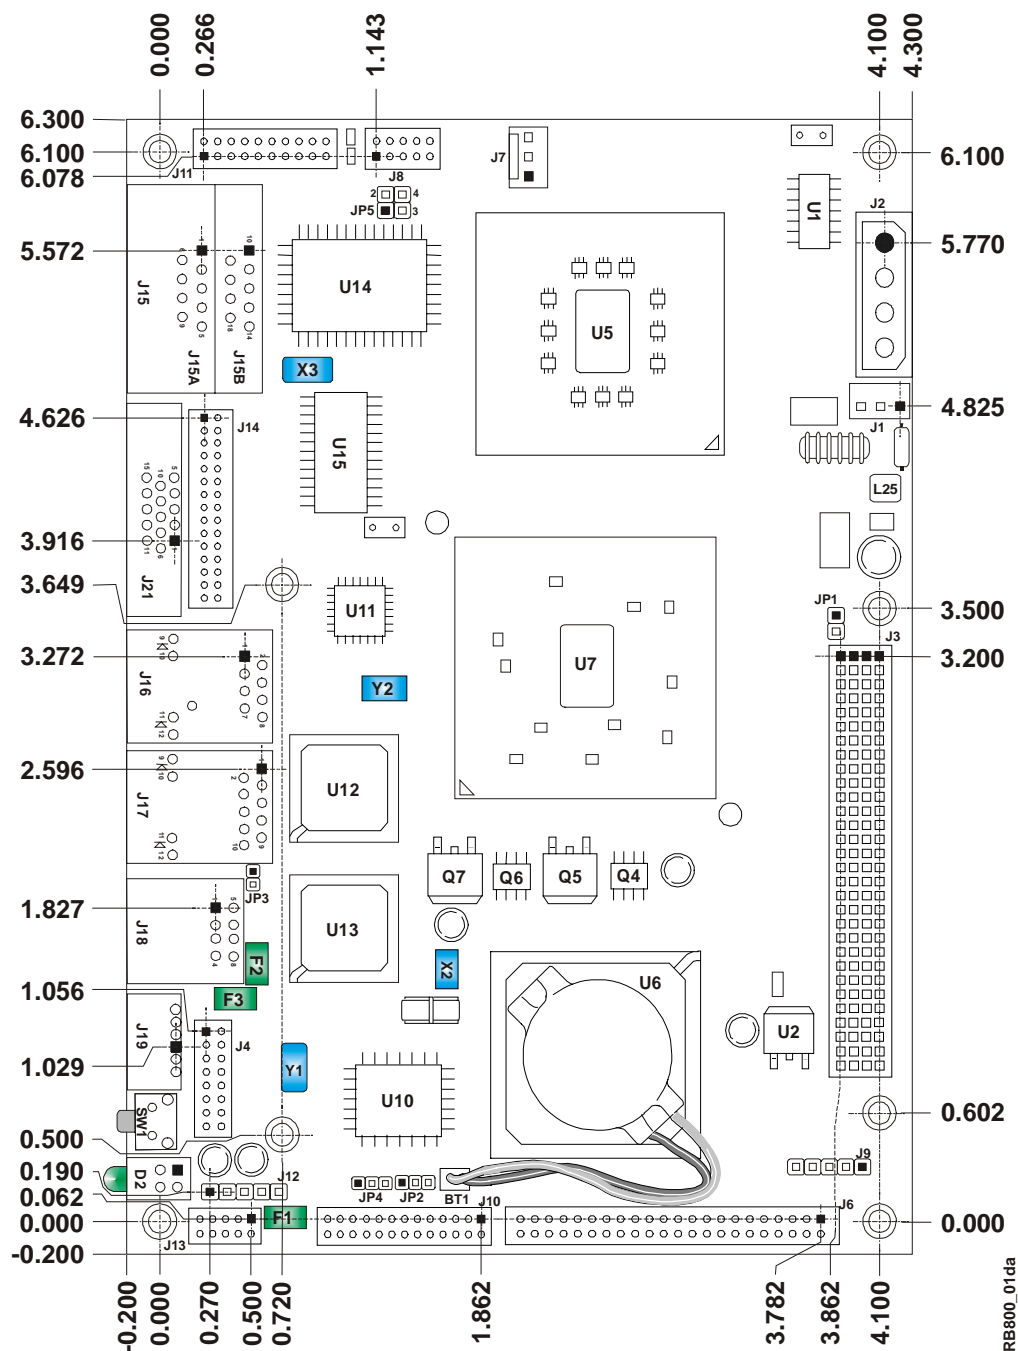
ReadyBoard 800 Dimensions (Top view)
